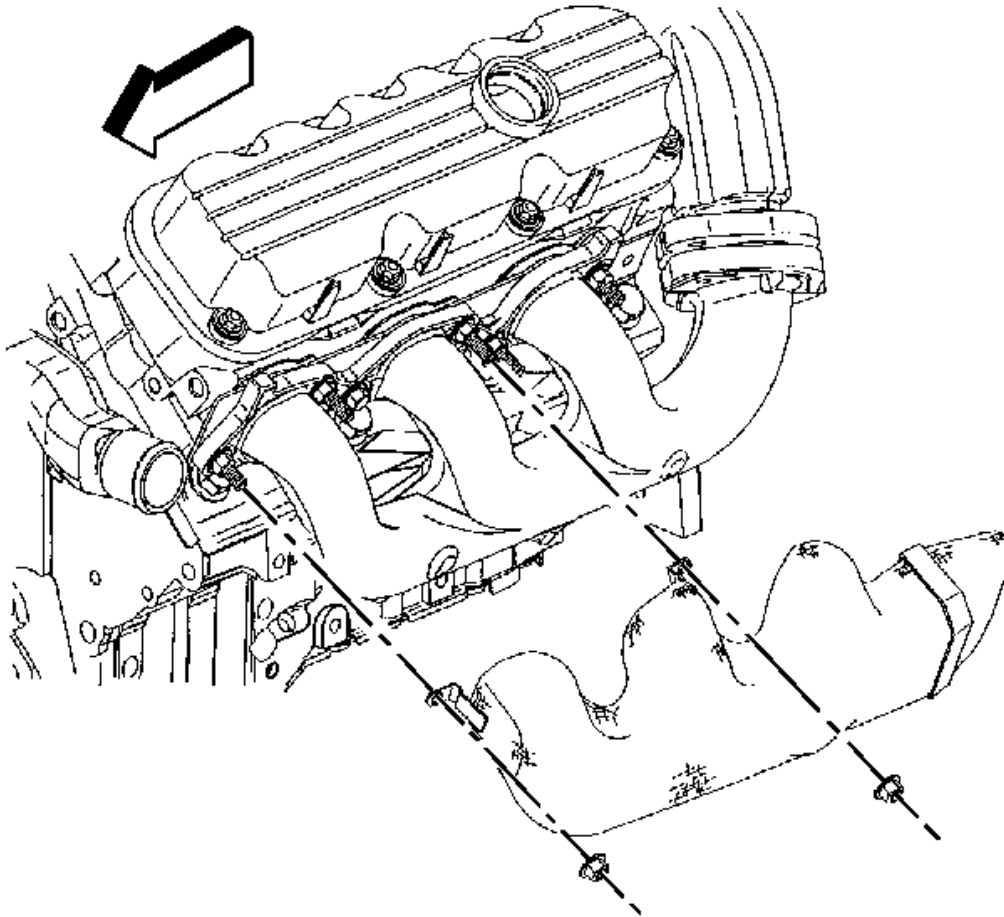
Removing Left Exhaust Manifold Heat Shield
